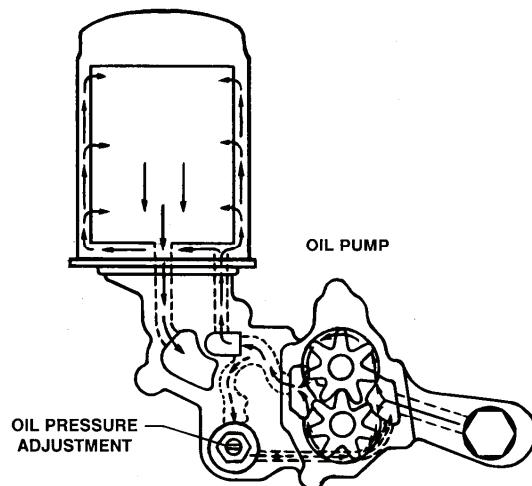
Adjustment Screw on the Oil Pressure Relief Valve
